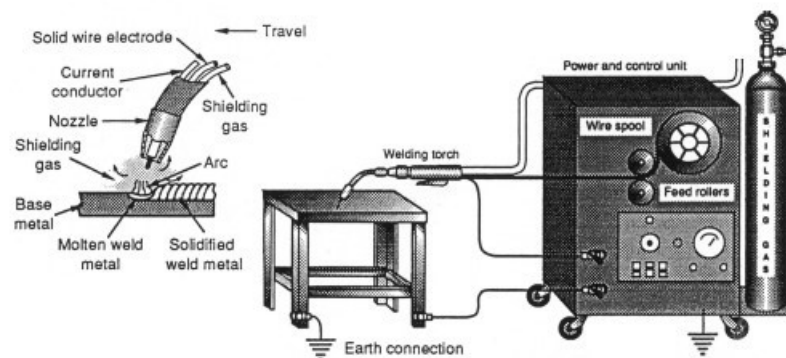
Metal inert-gas welding process. Adapted from: (Swift and Booker, 2003)
